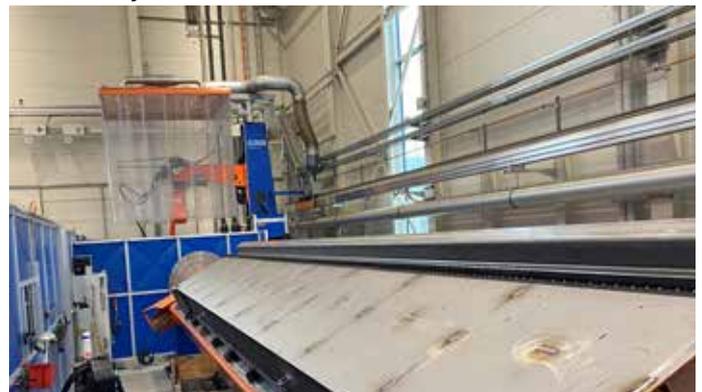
The new CLOOS robot system can weld workpieces up to a length of 11 metres.
